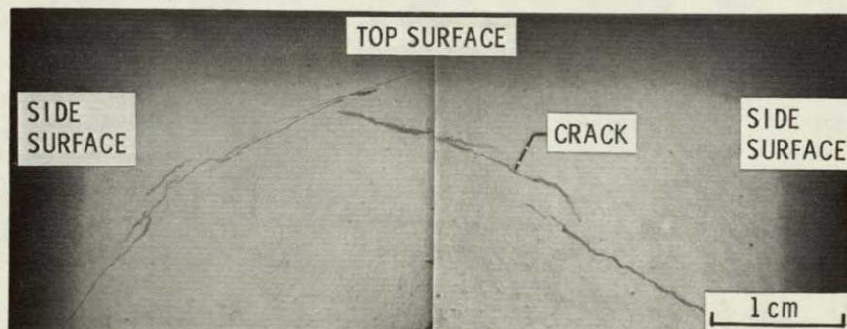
Typical fracture of modified Vasco X-2 gear teeth with NASA specified heat treatment carburized on all sides.
